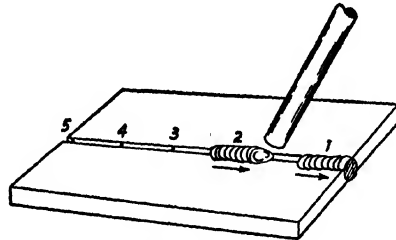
Back-step welding. Start a bead a short distance from the end and weld toward the end. Start the second bead a short distance back from the first one and weld toward it; and so on, welding a series of short beads.
